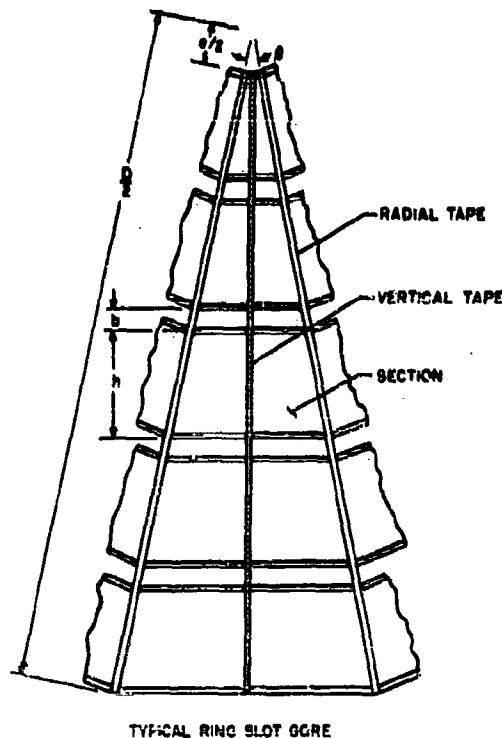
Core Construction of a Ring slot Type Parachute Canopy
